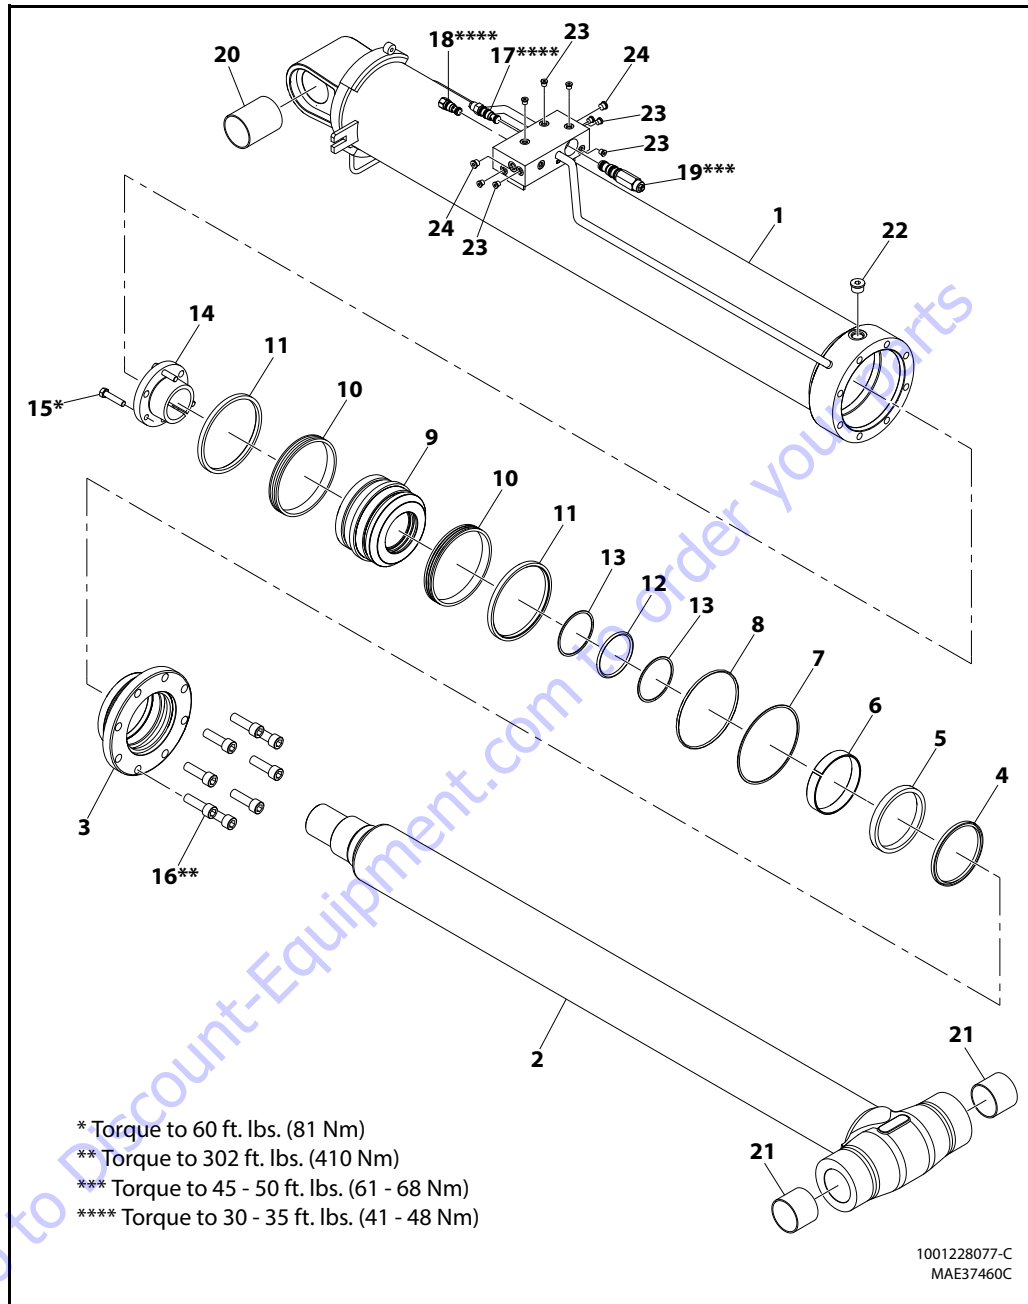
Tower Lift Cylinder (Prior to SN 0300144623)
